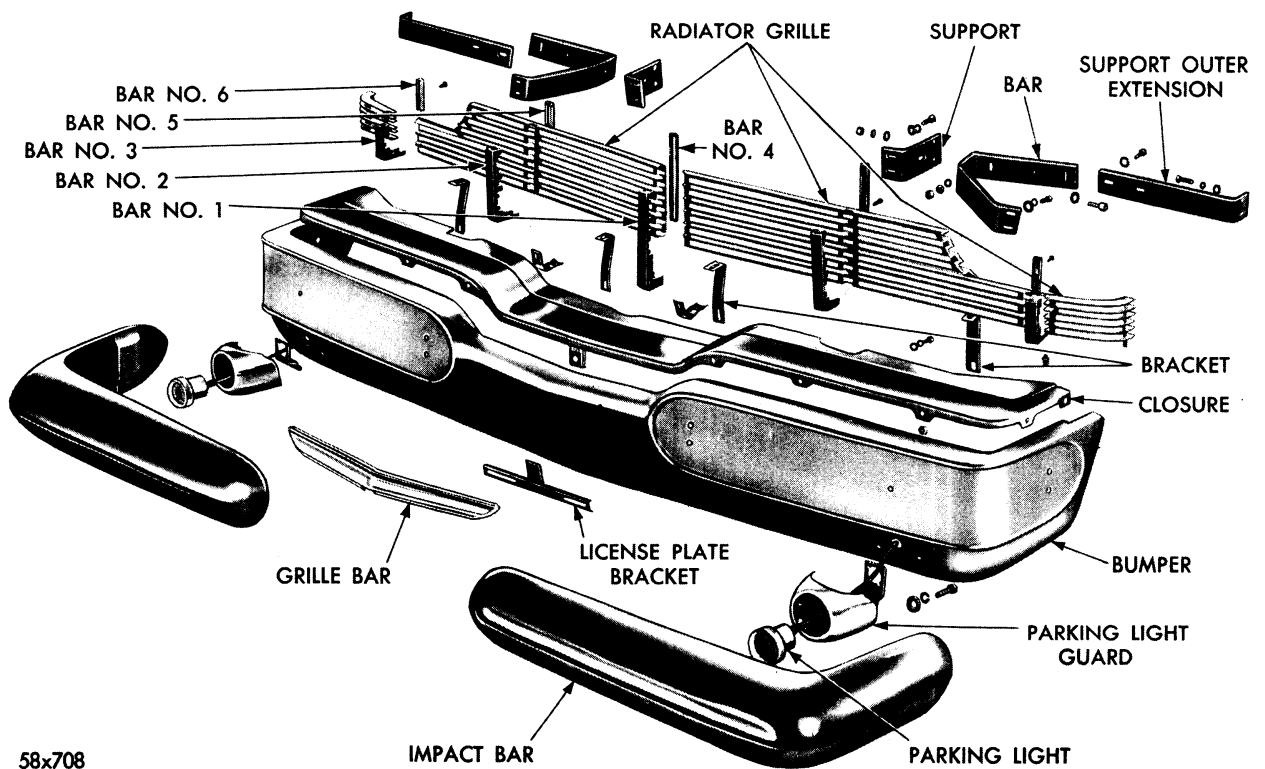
Bumper and Grille Assembly (Imperial Models)
